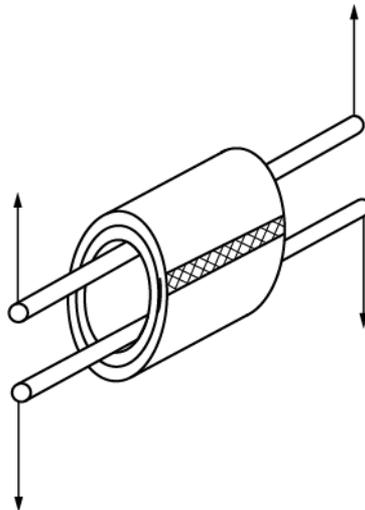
Schematic Presentation of the Pipe Ring Test Showing the Aluminum Weld at 90° to the Tensile Axis
